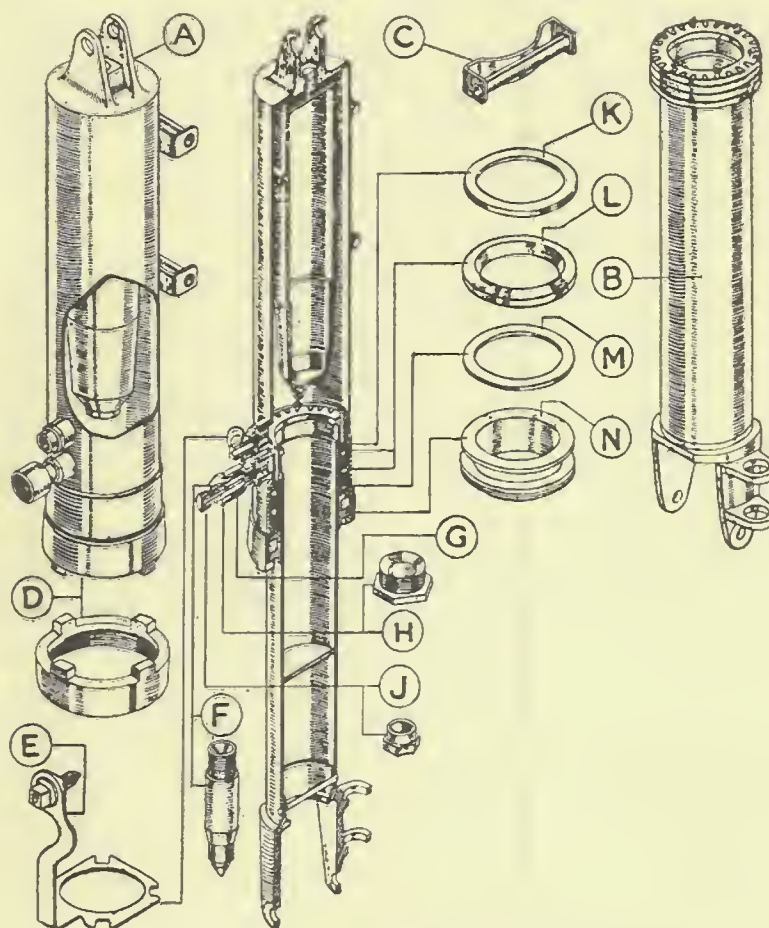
DETAILS OF OLÉO-PNEUMATIC LEG
